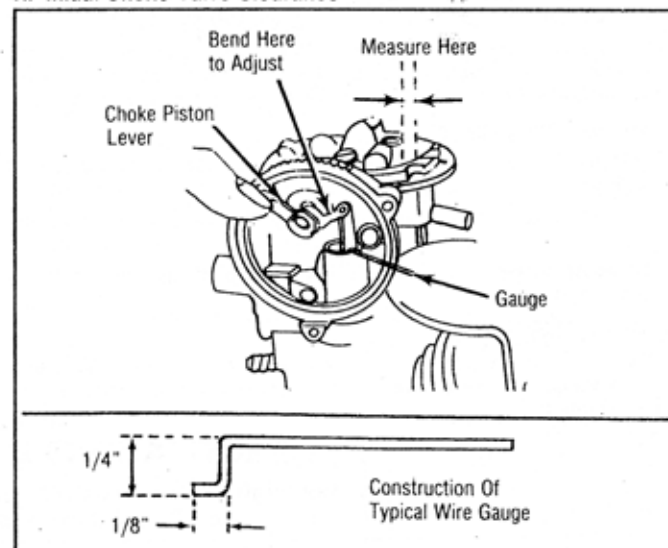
Initial Choke Valve Clearance Adjustment (Models Without Choke Vacuum Diaphragm)
